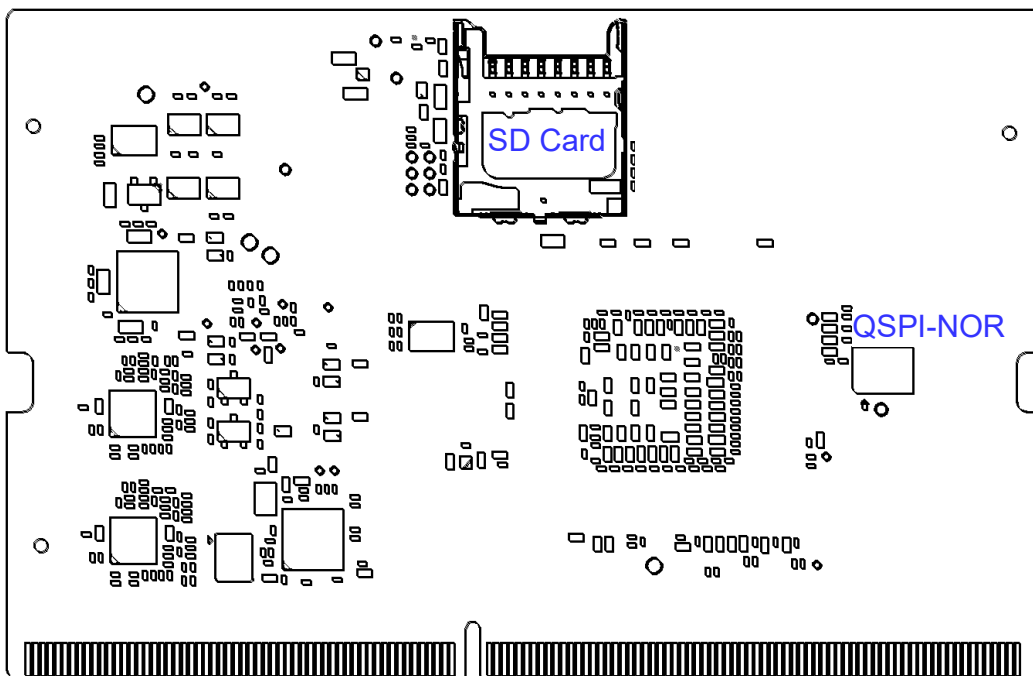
Jetson Nano Carrier Board Placement – Top View
